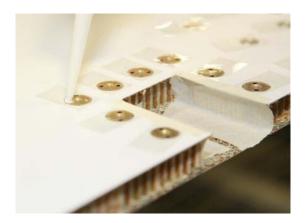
Representative Assemblies Showing Localized and Lineally Applied Inserts
